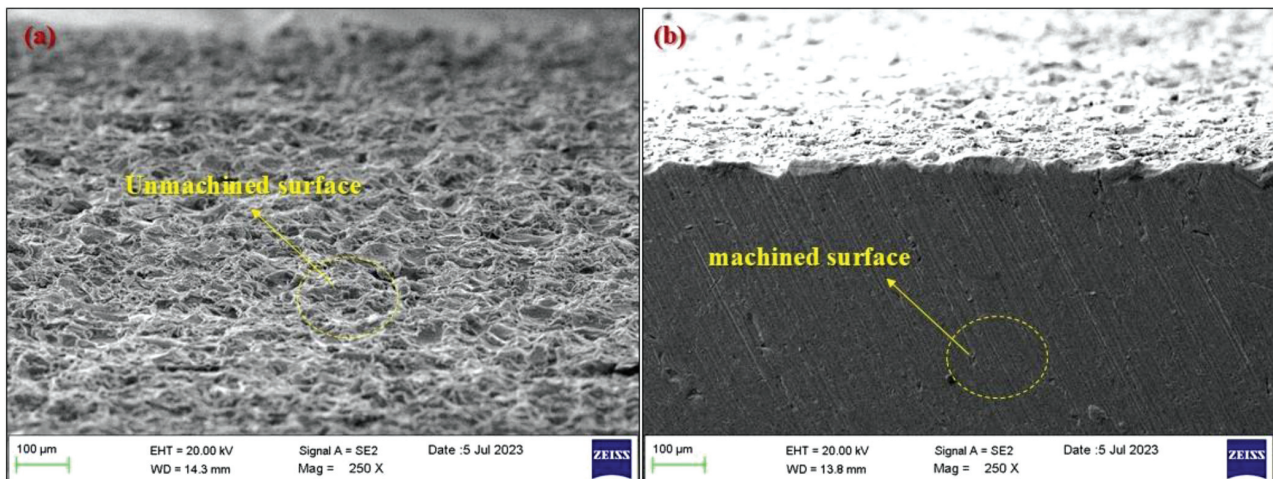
a) Unmachined surface and b) machined surface of Al-Cu UNS A92124-T851 alloy
